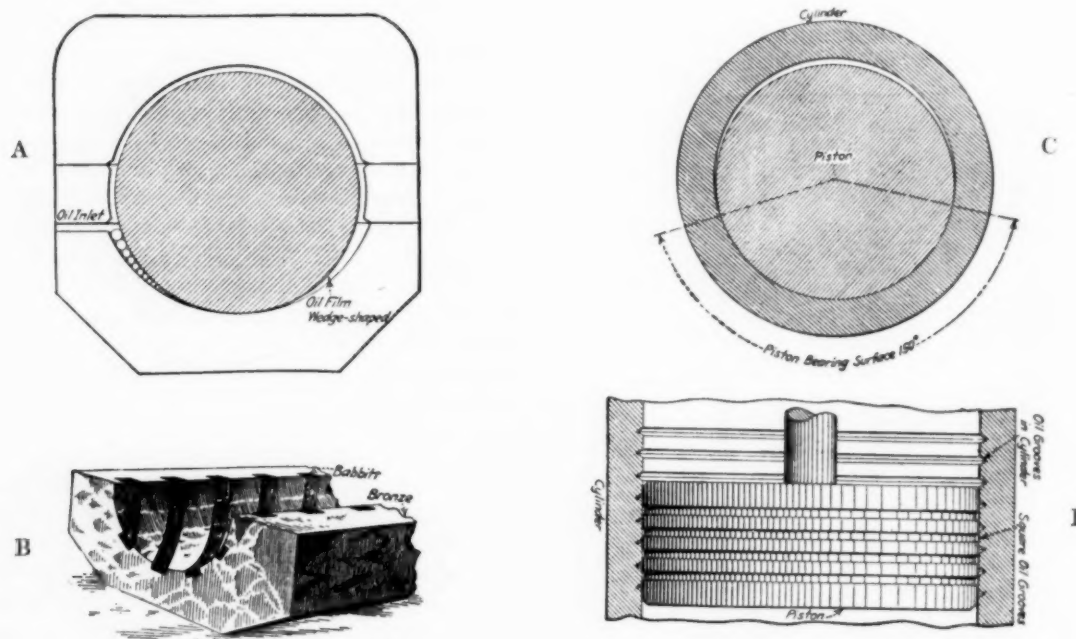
LUBRICATION OF BEARINGS AND CYLINDERS
